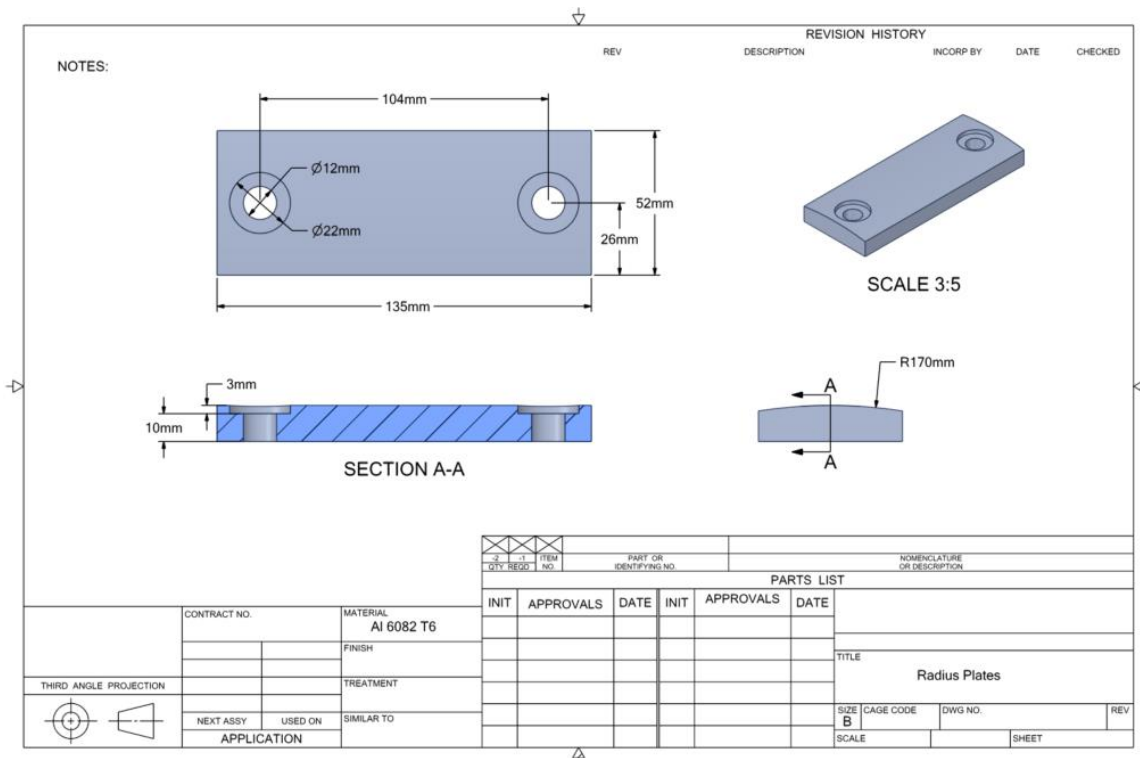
Aluminium 6082 T6 Radius Plates Drawing
